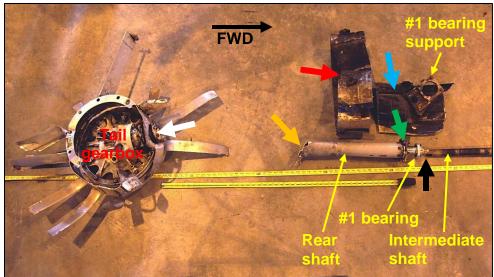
The rear pieces of the tail rotor drive shaft pieces recovered.
